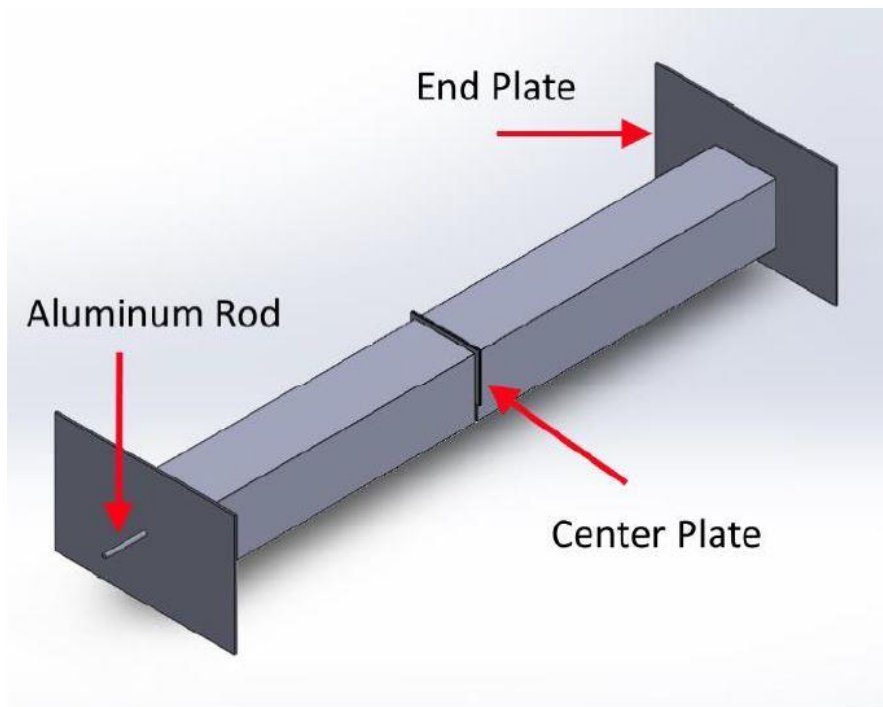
CAD drawing of Rectangular section ( $B/D = 1$ ) assembly
